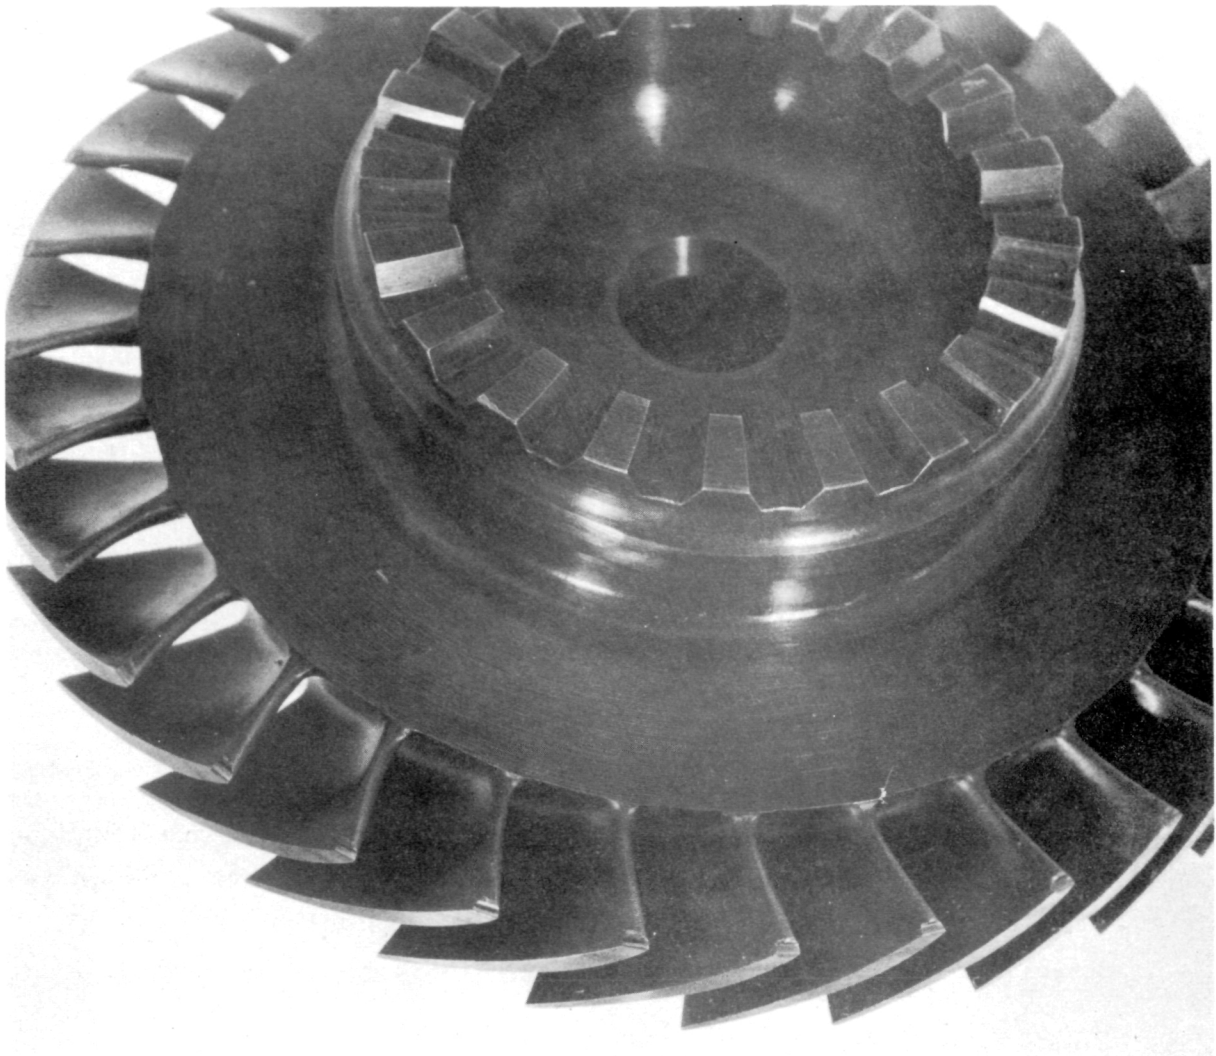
NASA 6:1 Compressor Test Rig, Inducer Failure, NASA Turbine Wheel Rub.
